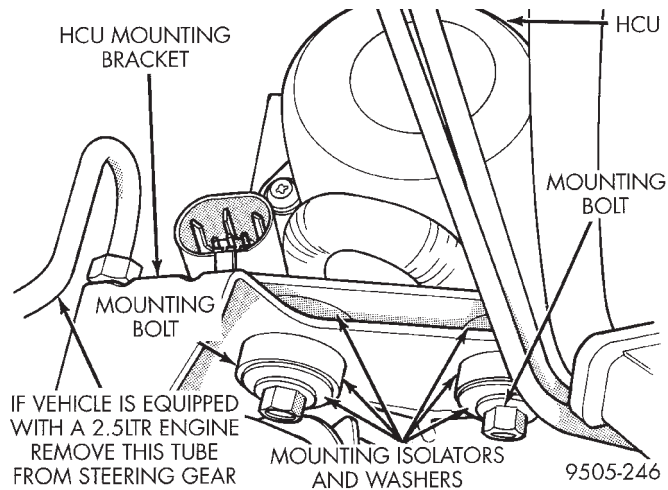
Rear Attachment Of HCU To Mounting Bracket
